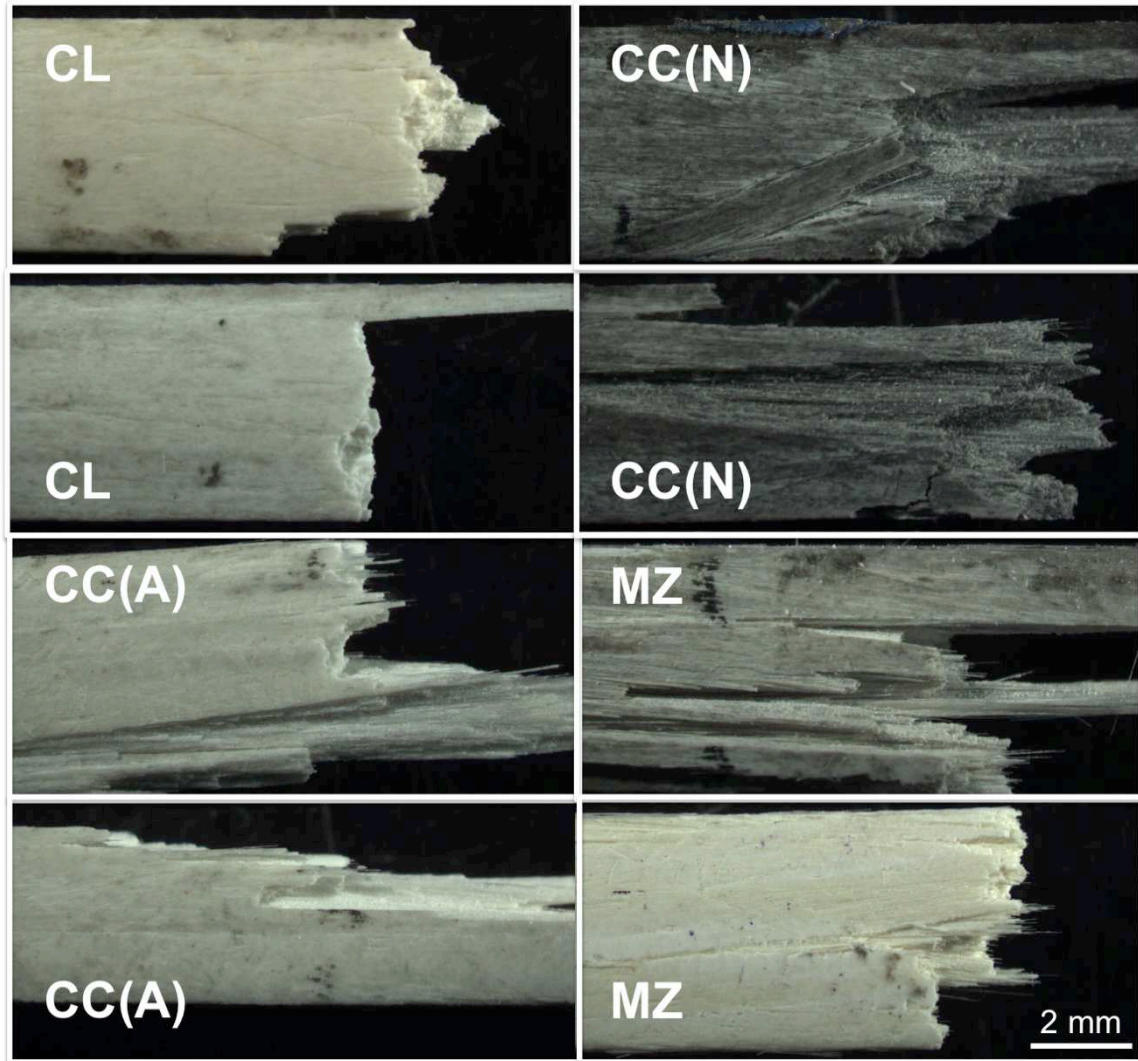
Fracture surfaces of GMCs tested in tension
